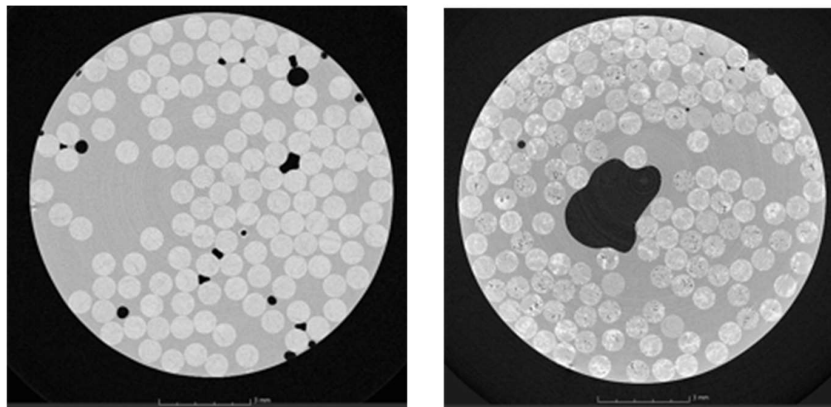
CT scan slices of struts manufactured using glass tools, 0.8mm diameter rods.
